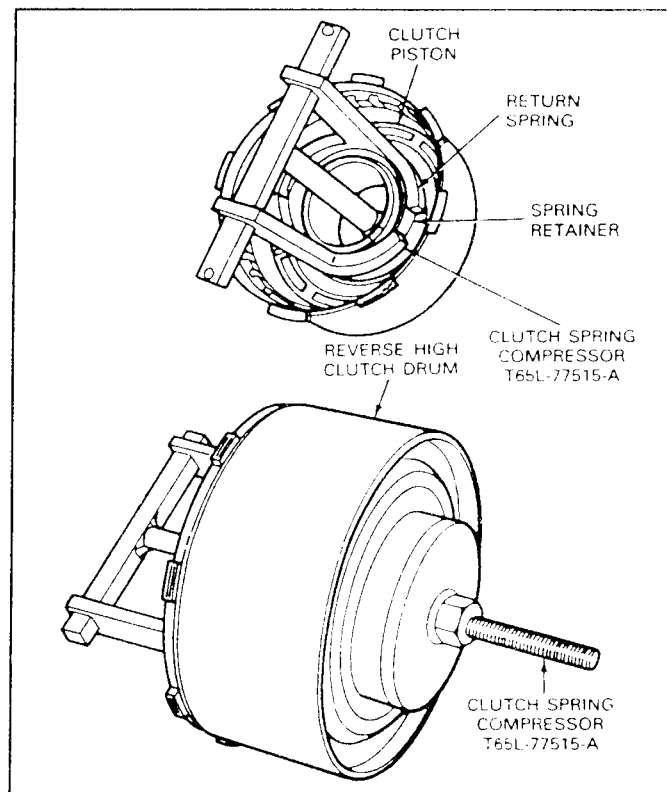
Removing or Installing Reverse-High Clutch Piston Snap Ring
